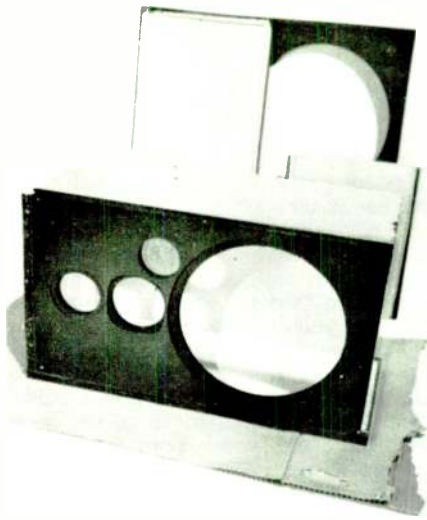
Assembly is simple and easy, parts fitting snugly and easily the first time.
